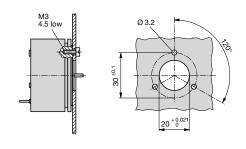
Drilling plan for fixing with 3 cheesehead screws M3.
